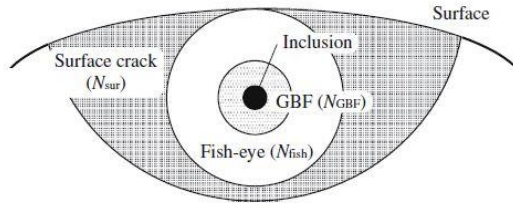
Schematic representation of formed fisheye and GBF during crack propagation at the fracture surface of the specimen [18].
